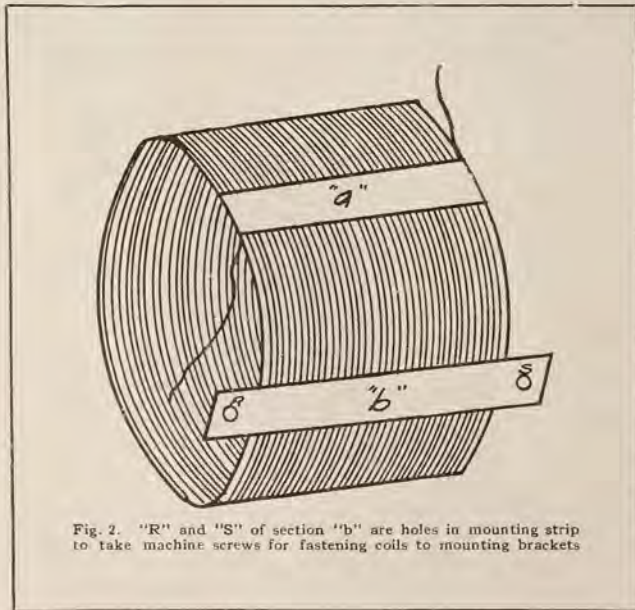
"R" and "S" of section "b" are holes in mounting strip to take machine screws for fastening coils to mounting brackets
